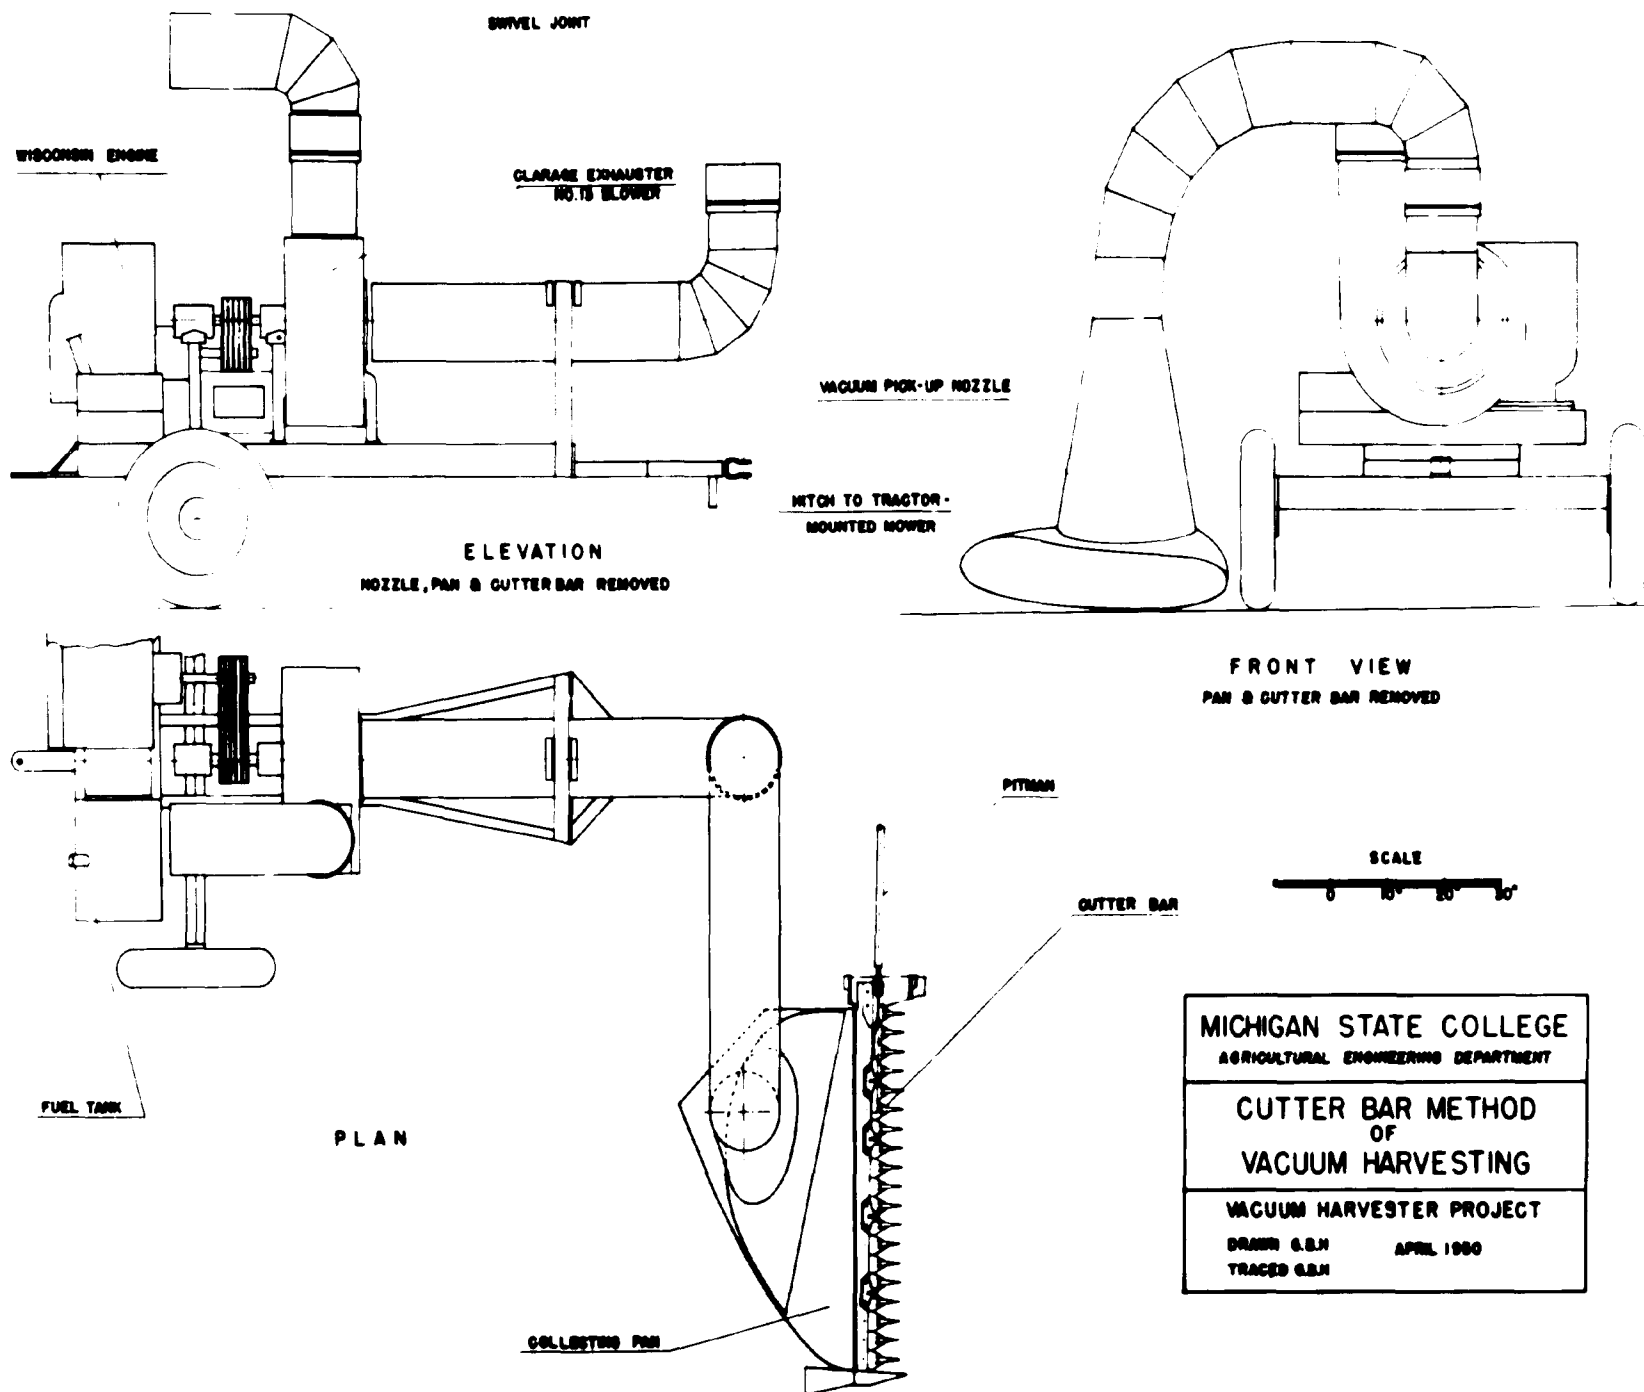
Cutter bar method of vacuum harvesting - assembly drawing.
